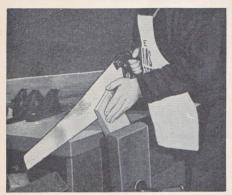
Making depth cut of half lap joint with ATKINS Silver Steel Hand Rip Saw No. 53.
